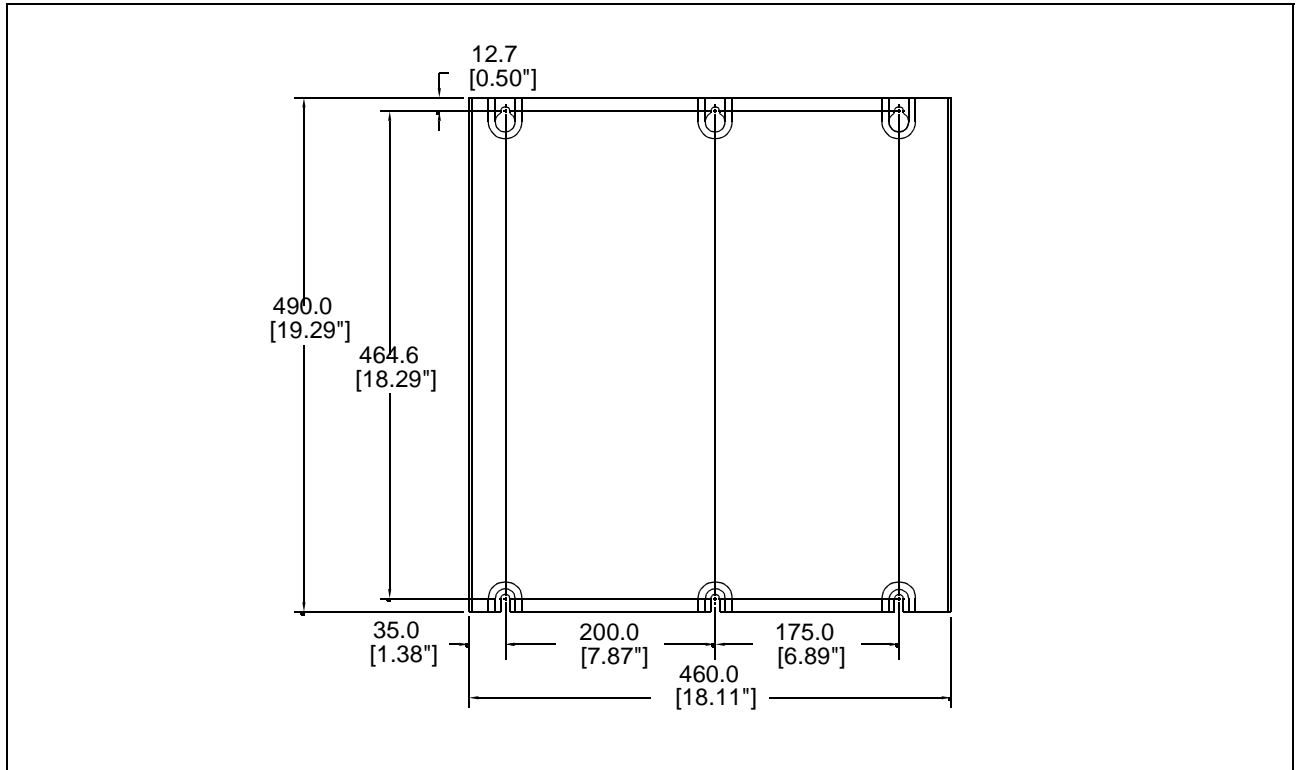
40 HP to 75 HP @ 230 VAC / 75 HP to 150 HP @ 460 VAC Drive Mounting Hole Pattern
